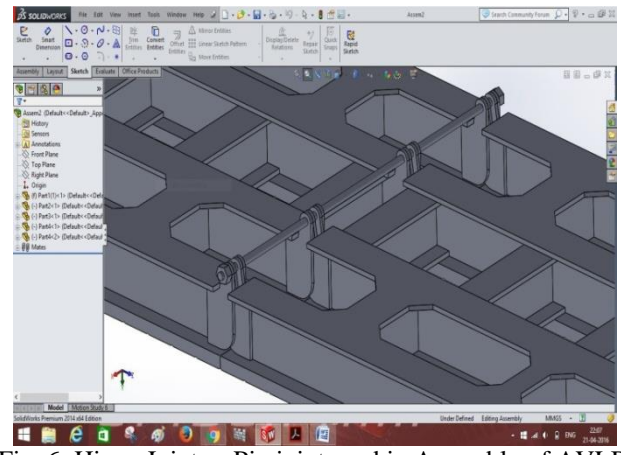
Hinge Joint or Pin joint used in Assembly of AVLB Model.
